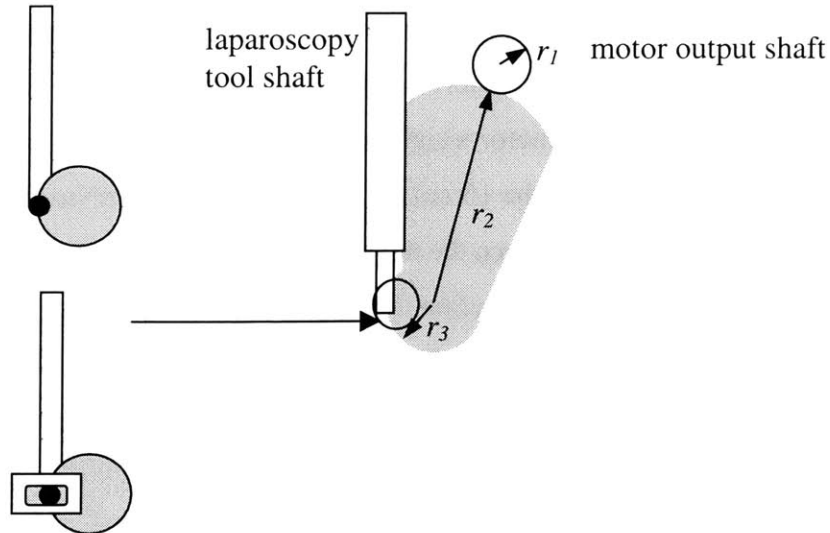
Arc section cable drive schematic. At left are two possible coupling configurations between the inner tool shaft and the arc section.
